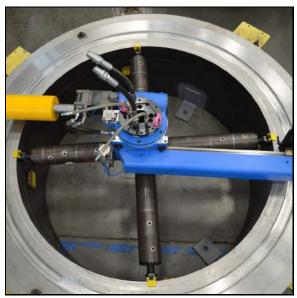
PLACE THE ID CHUCK IN THE FLANGE
